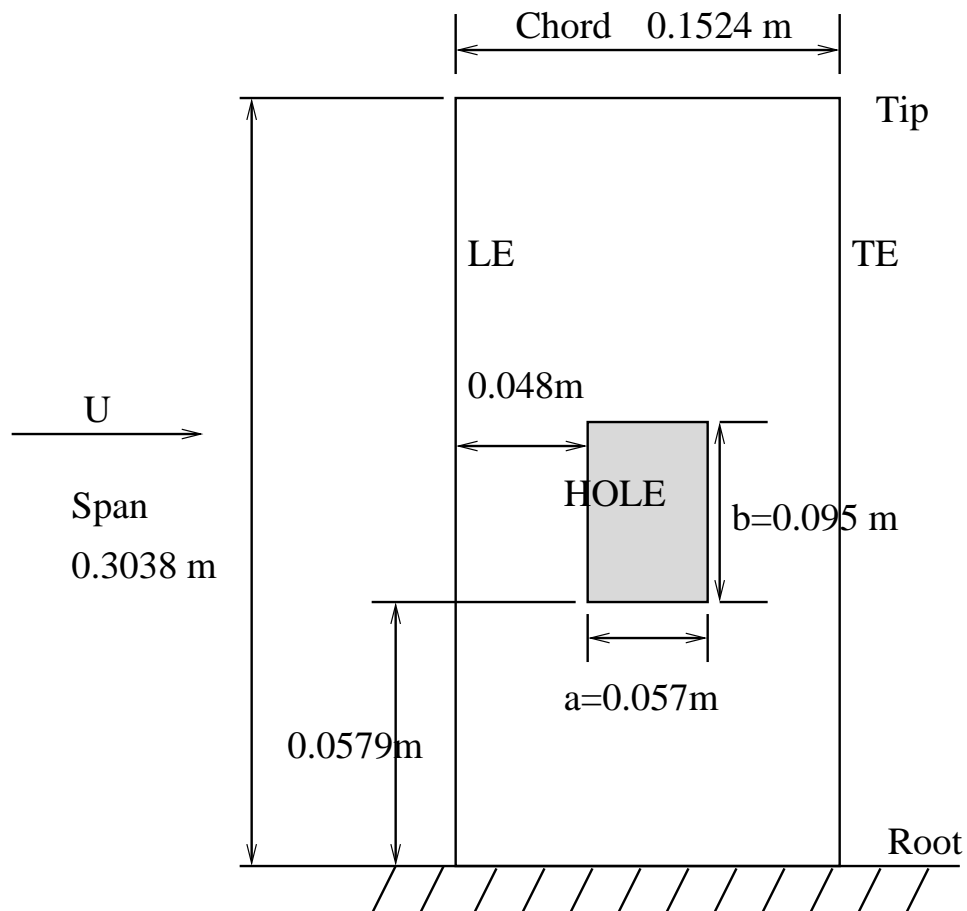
Dimensional drawing of rectangular wing with hole near root
